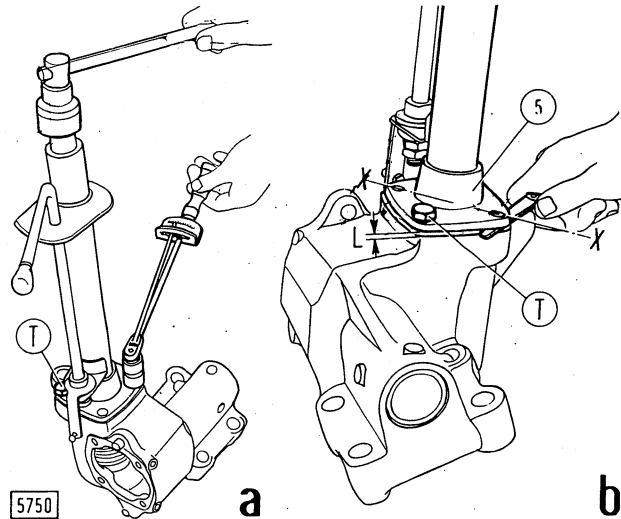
Adjusting the steering shaft tapered roller bearings.
